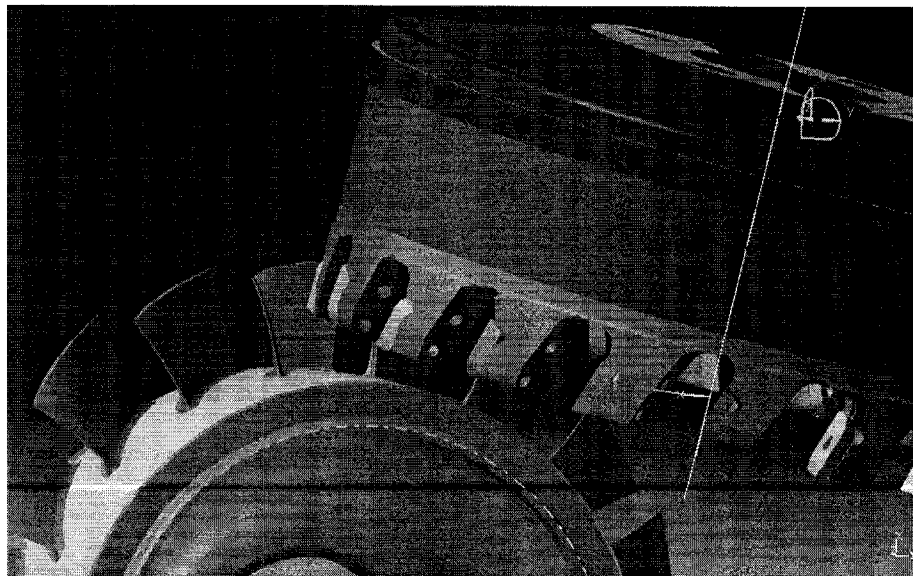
The relative machining position of the CATIA 3D models of the IBR part and the cup mill cutter
